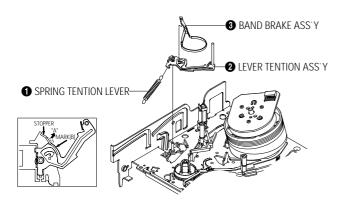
Lever Tension Ass'y, Band Brake Ass'y Removal
